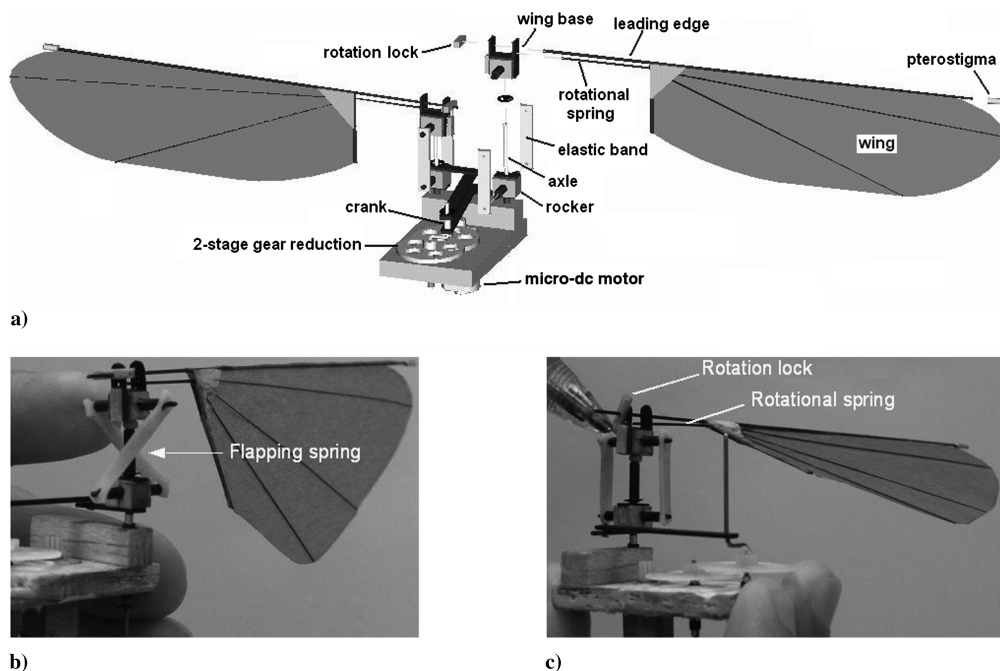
Details of design 1: a) CAD model showing various components, b) twist in elastic band flapping spring (actual prototype), and c) rotational spring and lock mechanism (actual prototype).
